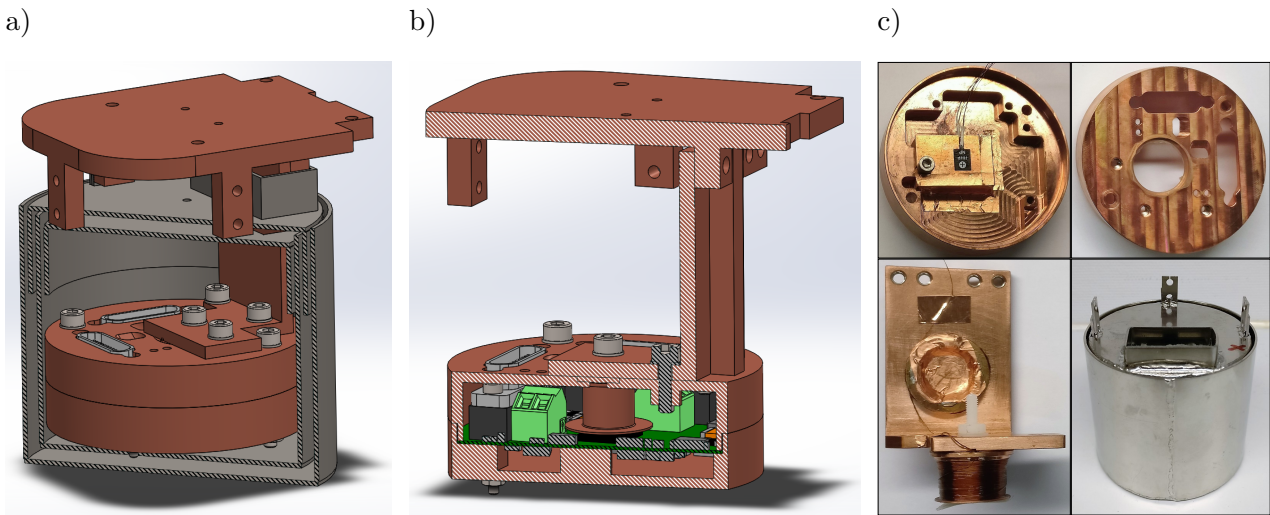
Sample box and magnetic shield. Fig. a) and b) show CAD drawings of the sample holder in sectional view. In a), we can see the magnetic mu-metal shield that surrounds the copper box and in b) the assembly with the PCB is illustrated. Plot c) shows pictures of the individual components.
